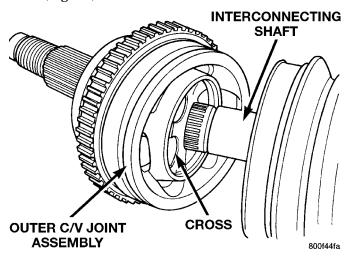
Outer C/V Joint Correctly Installed on Interconnecting Shaft
